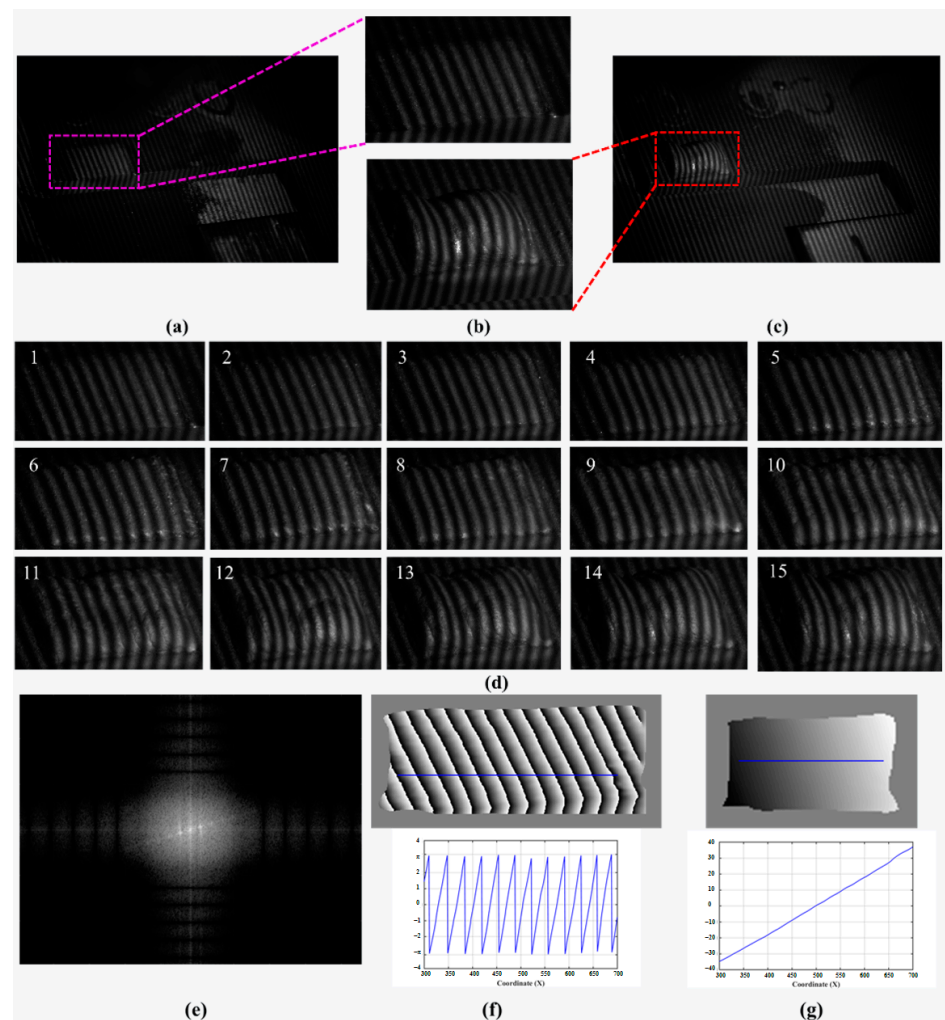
Deformation fringe pattern taken during additive manufacturing of metal parts (taken by the left camera). (a) deformation fringe of the first printed layer; (b) comparison of fringe changes of metal parts after printing the 1st and 15th layers; (c) deformed fringe image of 15th printed layers; (d) deformed fringe images of different layers; (e) Fourier spectrum of the dashed region of the (a); (f) wrapped phase of (e); (g) unwrapping phase of (f).
